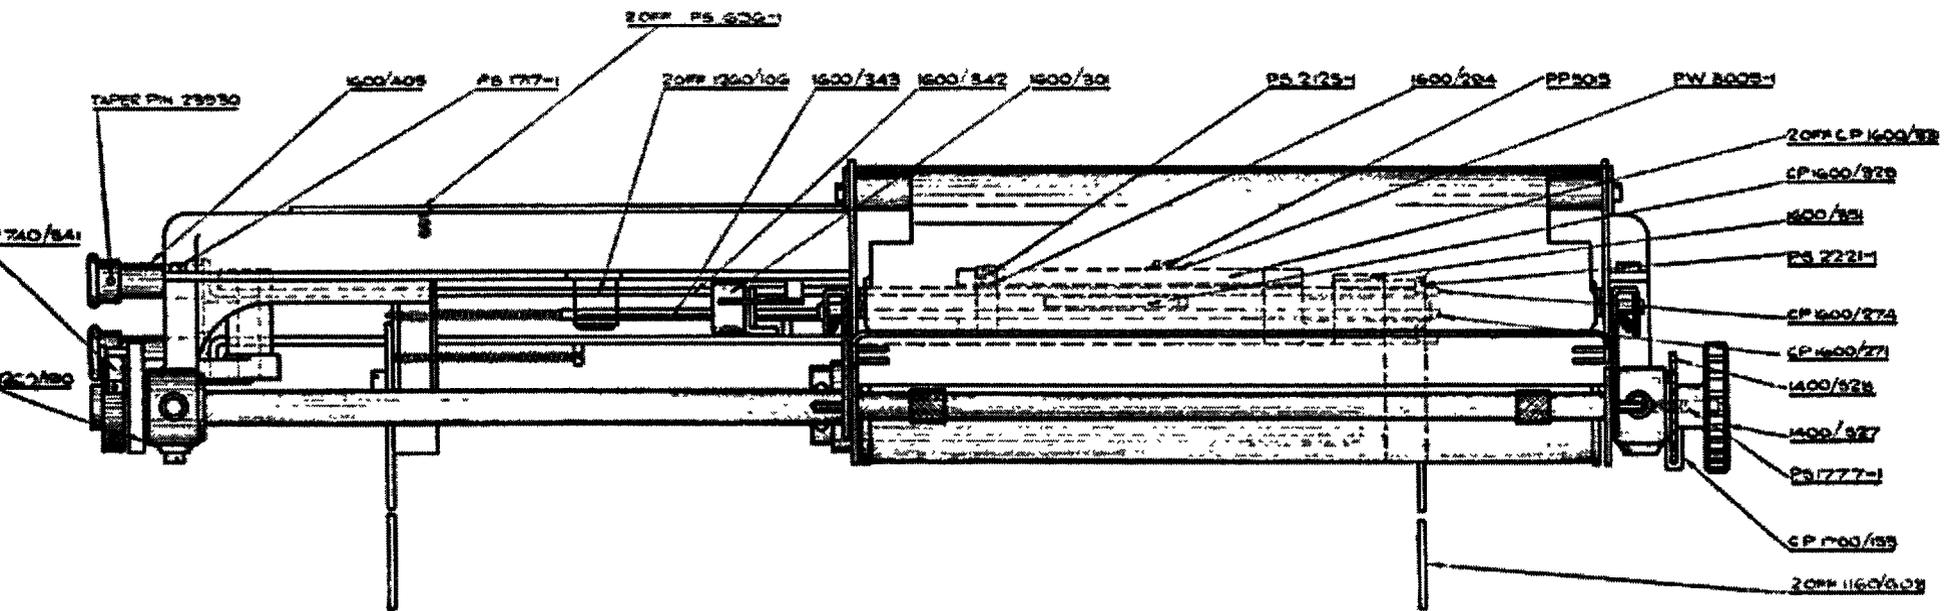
MORSE PAGE PRINTER CARRIAGE ASSEMBLY (Plan).
